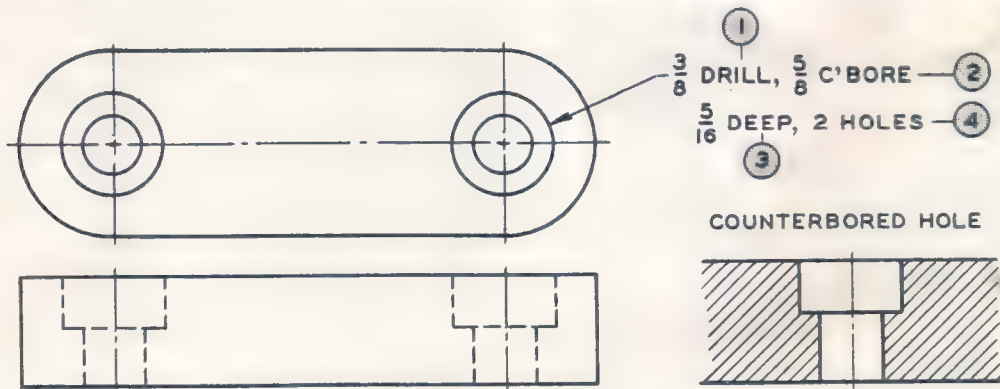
DIMENSIONING COUNTERBORED HOLES
